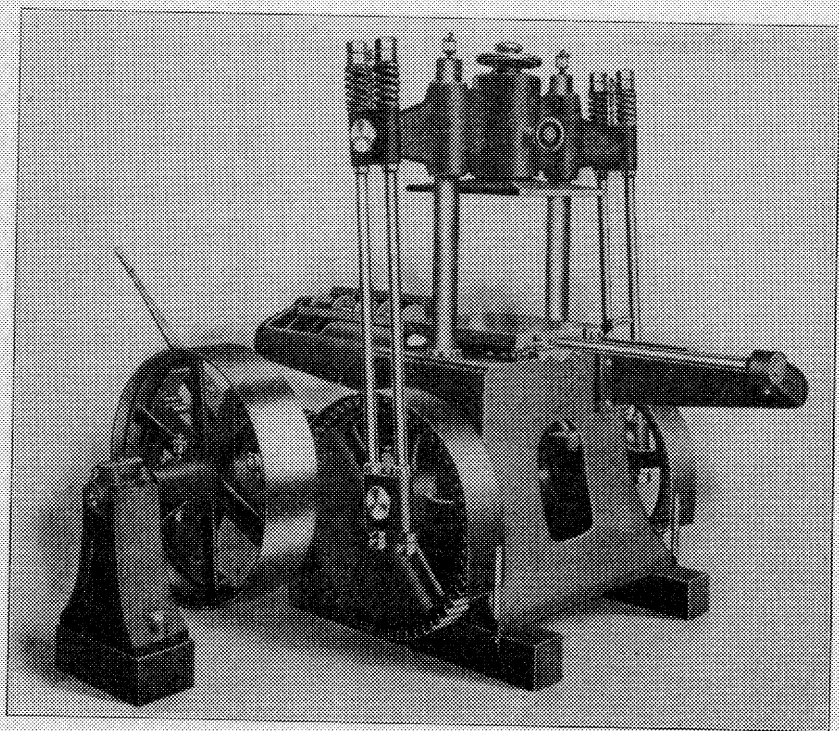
Trimmings Press, made by the American Clay Machinery Company.
